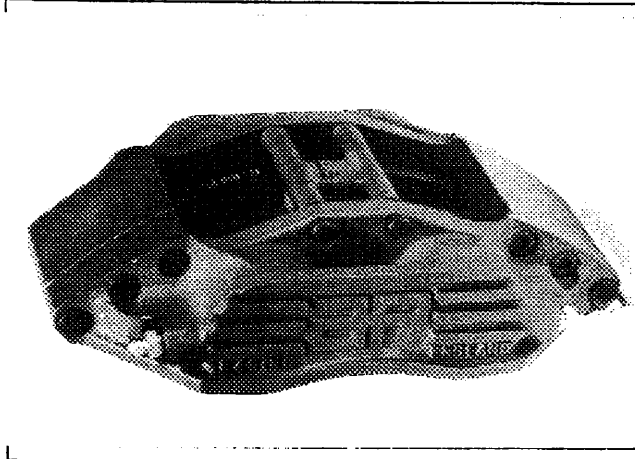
FRONT AND/OR REAR BRAKE CALIPER
